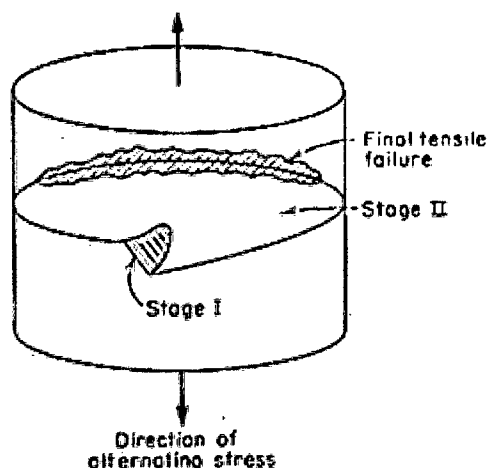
Location of the 3 steps in a fatigue fracture under axial stress
